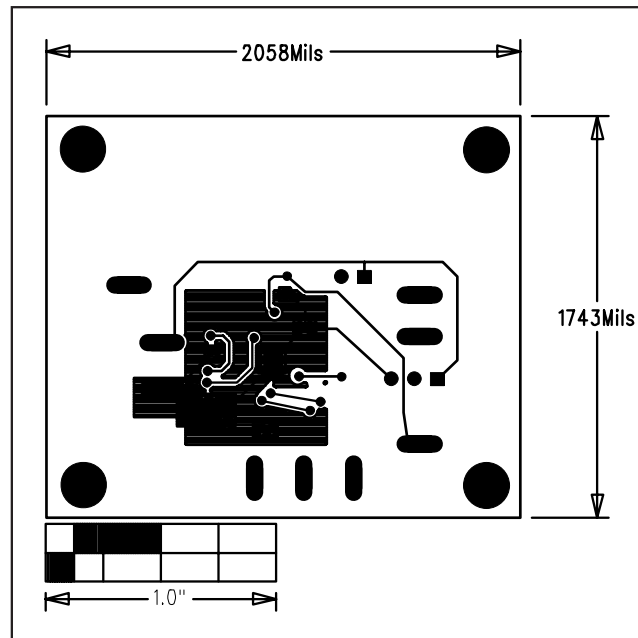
MAX1579 EV Kit PC Board Layout—Solder Side
